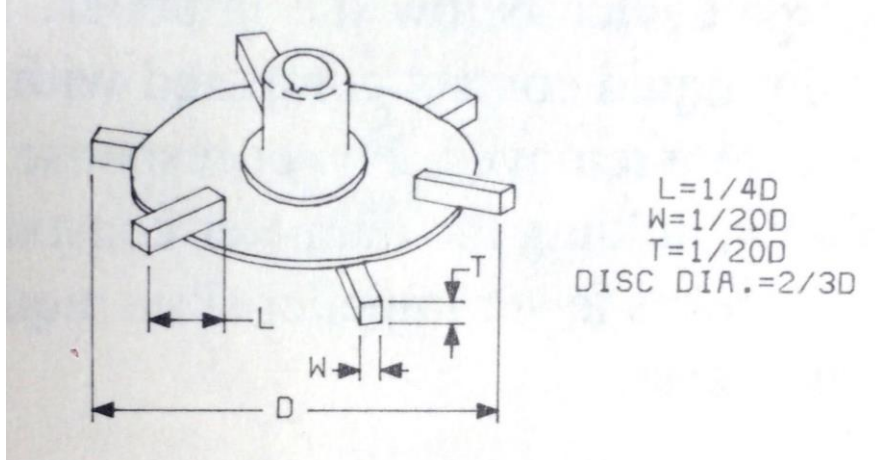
Bar turbine, six blades bolted/welded to top and bottom of support disk.
